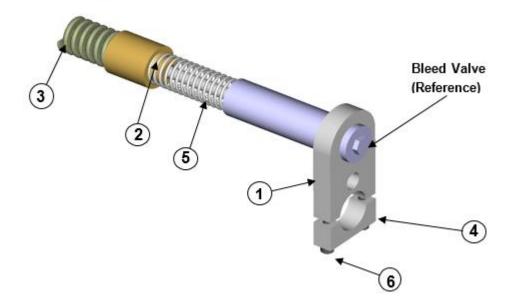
Damper Spring Assembly Reference Drawing 175-4050
